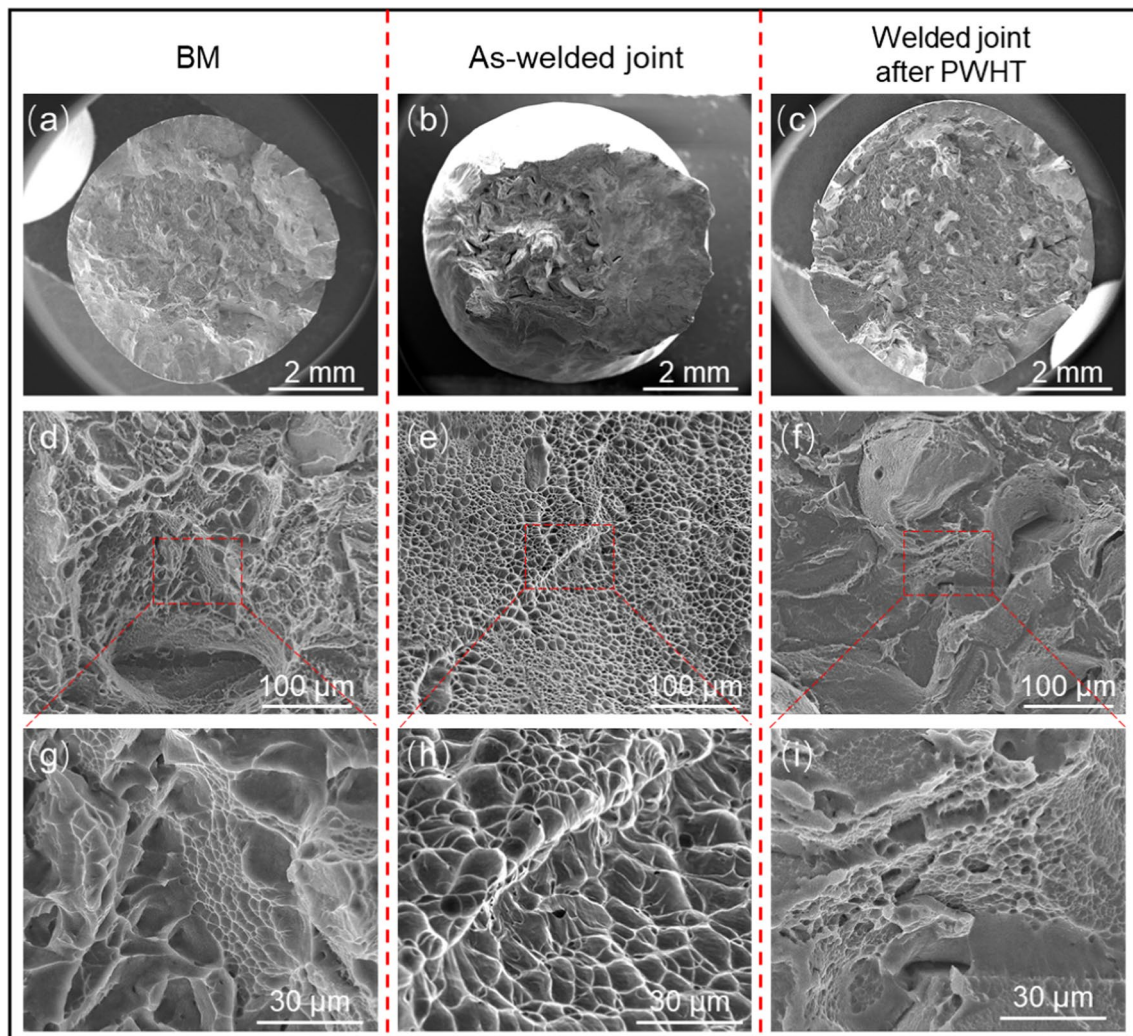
Tensile fracture morphology of BM, as-welded, and PWHT joint. a, b, and c are the macro fracture morphology of BM, as-welded, and PWHT joints, respectively. d, e, and f are the local mor-
